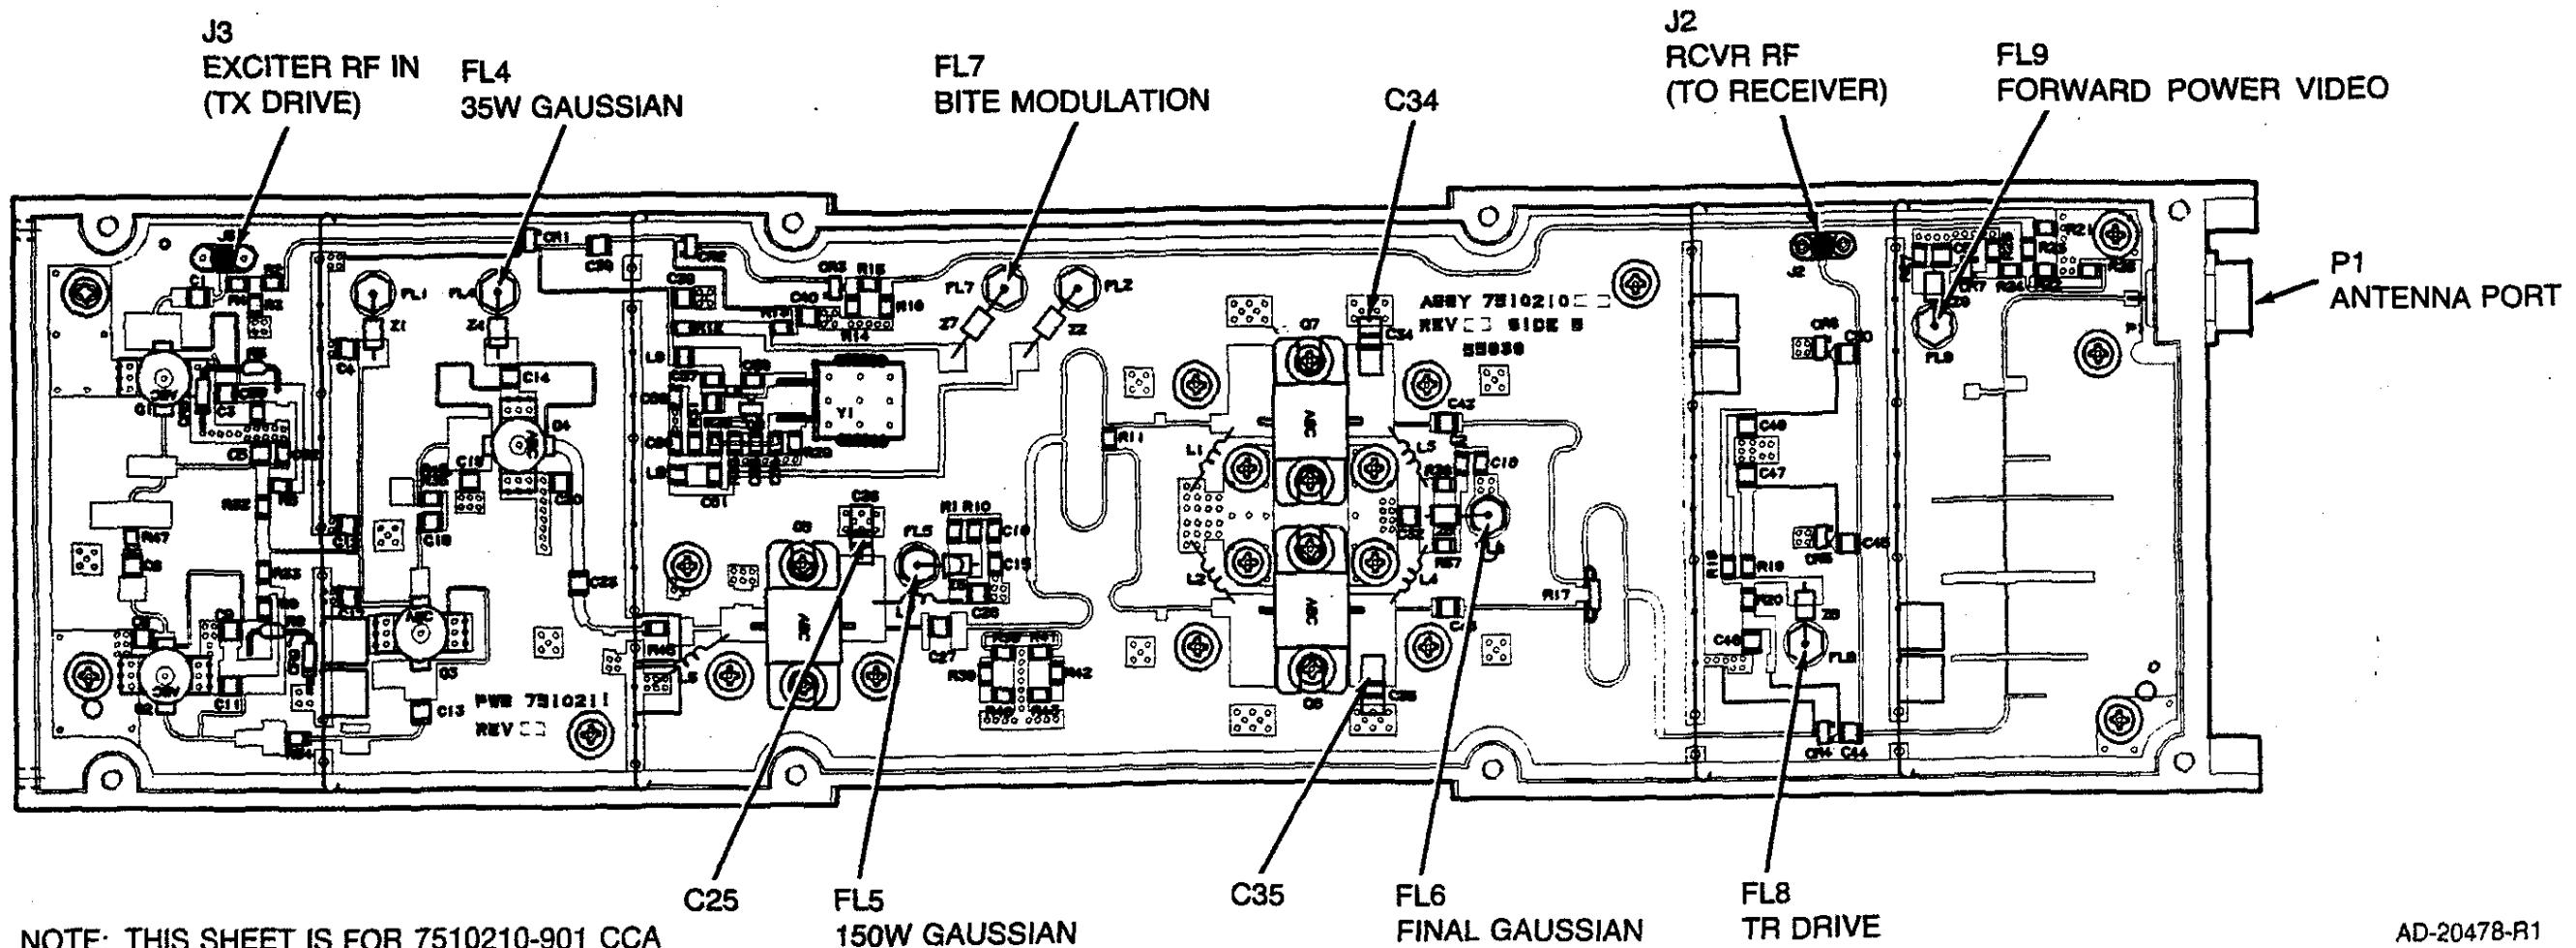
Transmitter CCA A3 Test Points and Adjustable Component Locations (Sheet 1)
